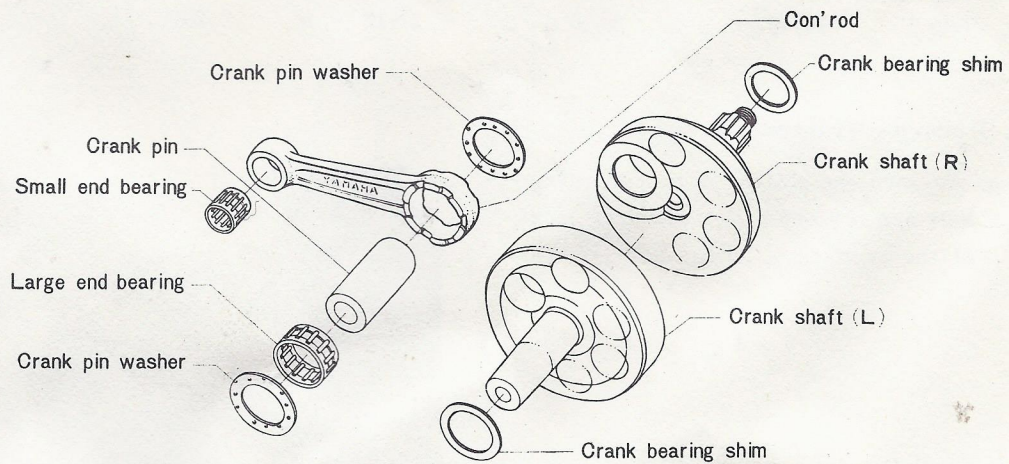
Crankshaft Ass'y Component Parts
